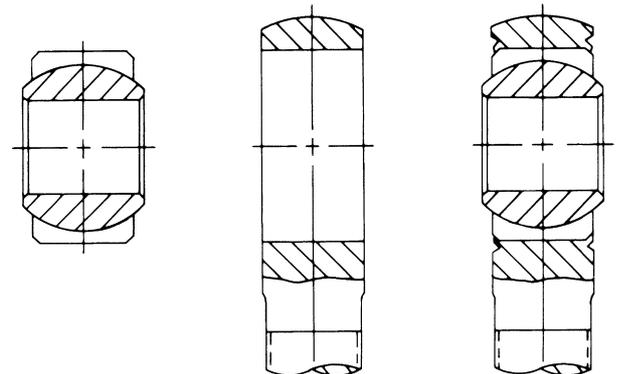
3- PIECE, HOUSING STAKED ROD END
